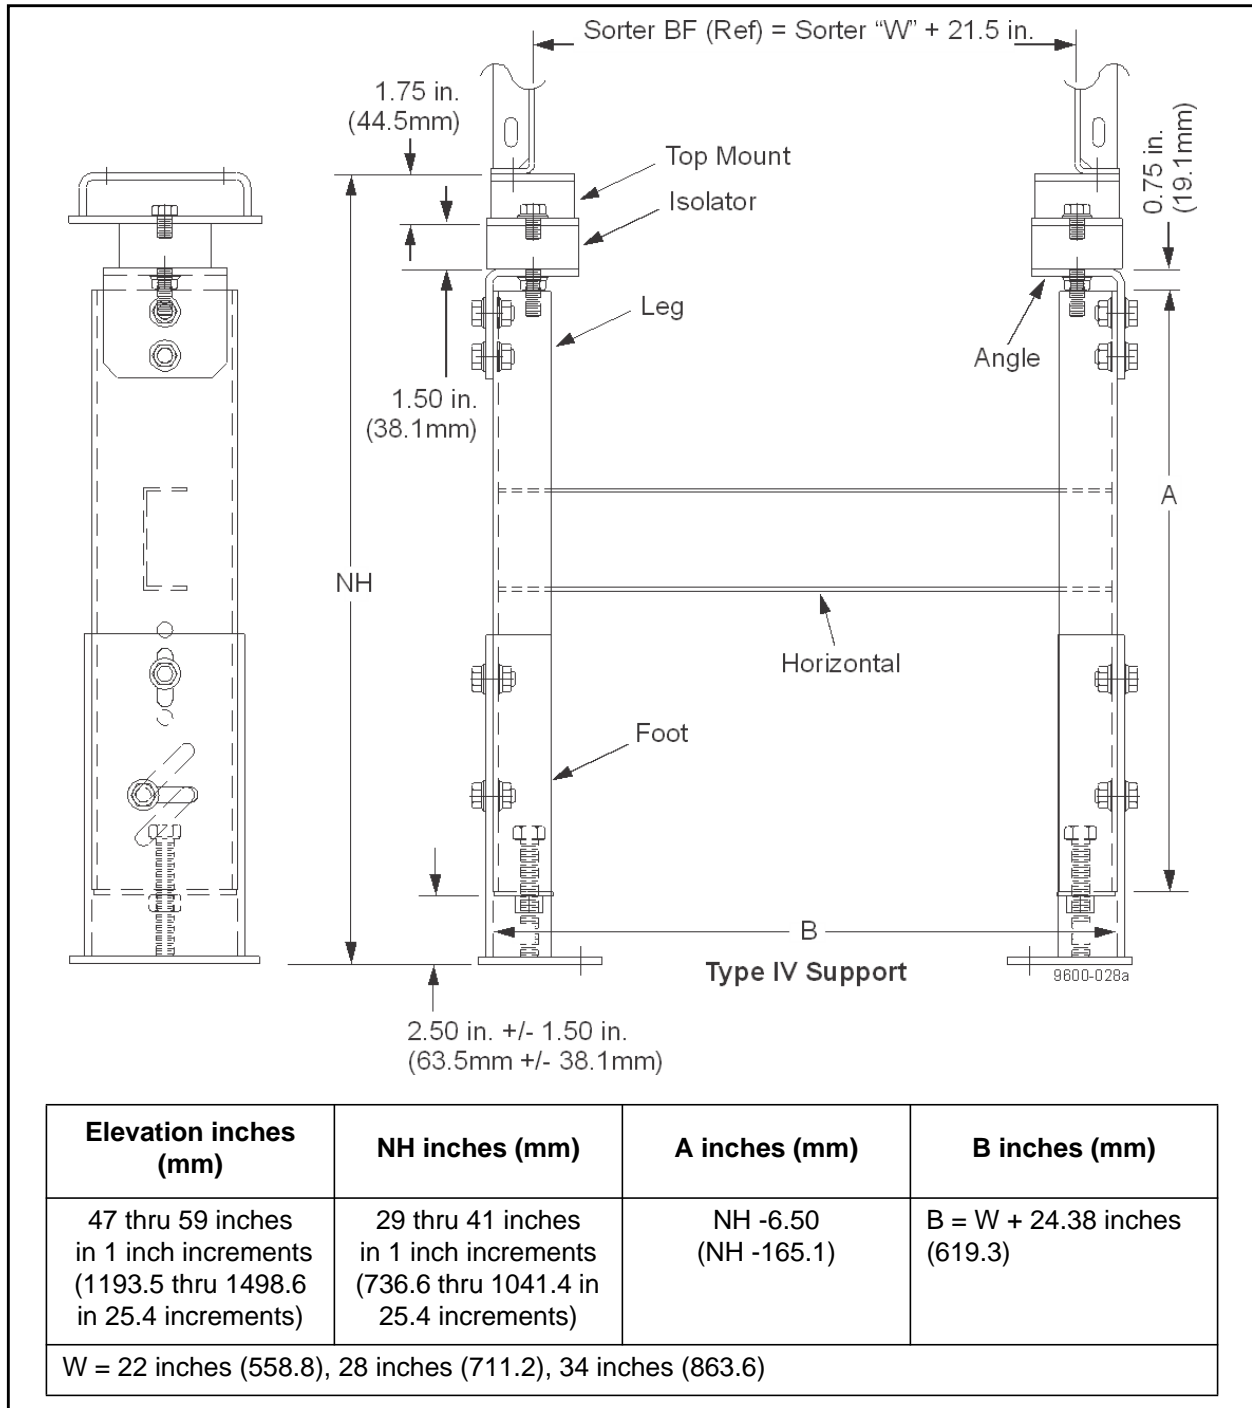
5 Type IV Floor Supports - with 2 Horizontal Braces - Intermediate and Idler Sections
